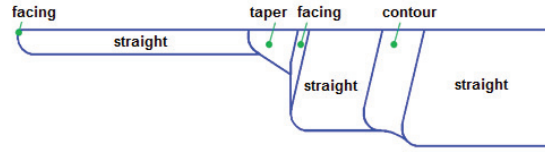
Tool-workpiece engagement profiles for all the seven steps
